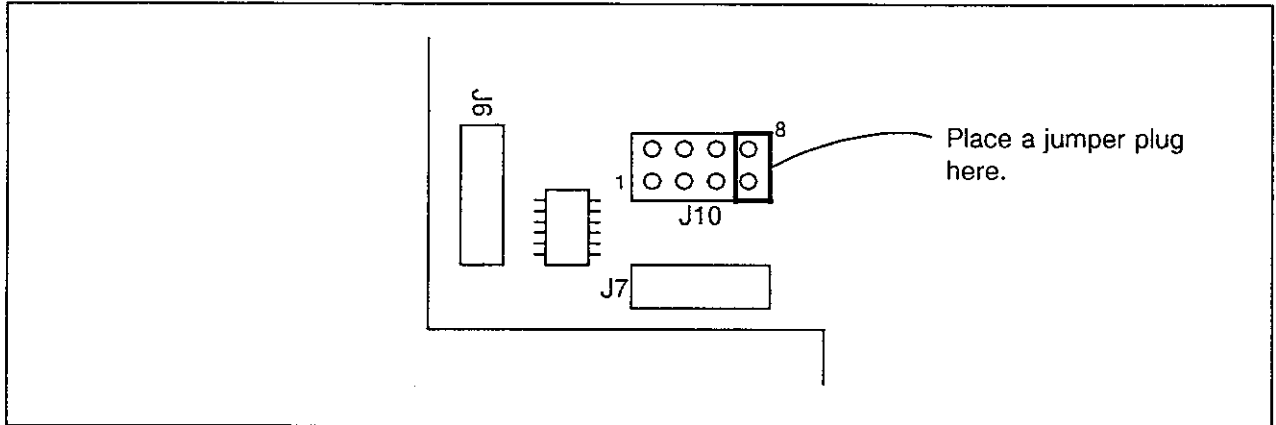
Jumper Plug Insertion Position on CPU Board
